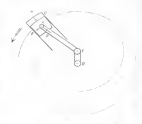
REVOLVING CRANKSHAFT ENGINE.
